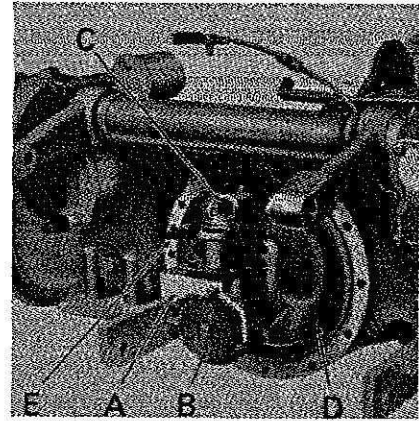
View with PTO housing and gear assembly removed showing early type (Dowty) pump (A).
